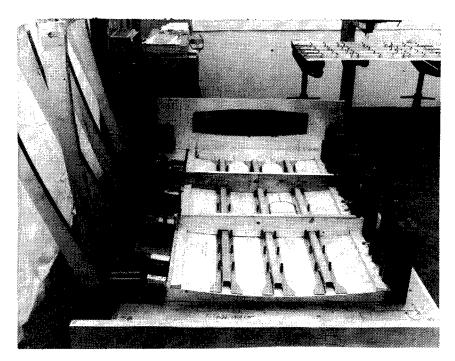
Assembly Fixture with Top Supports Pulled Back Showing Cleco Fasterners in Place.
